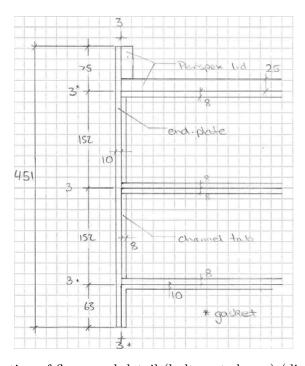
Elevation of flume end detail (bolts not shown) (dimensions in mm)
